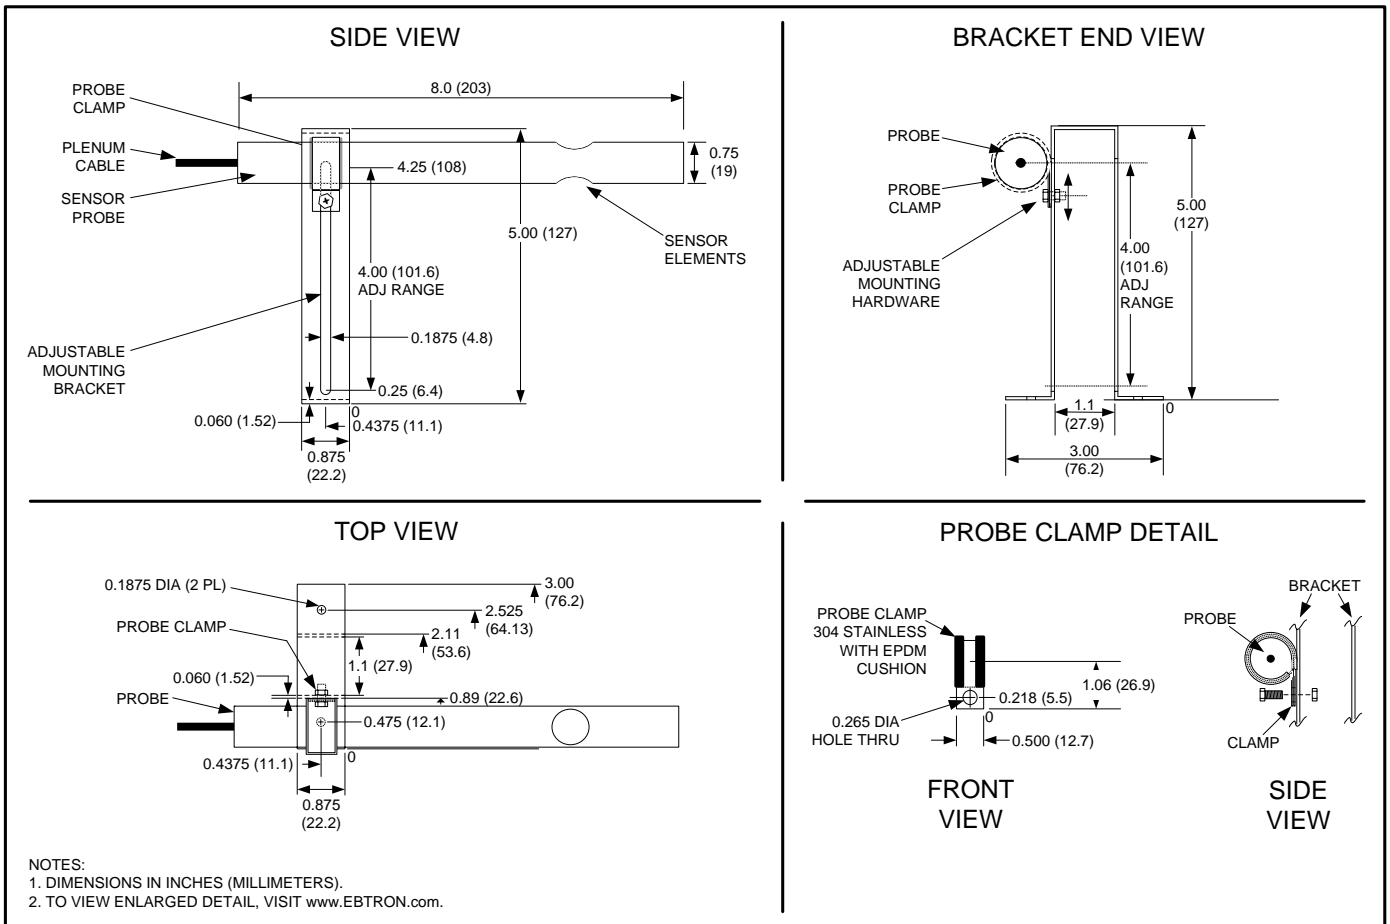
HE1 ERV Probe and Mounting Bracket Installation Dimensions
